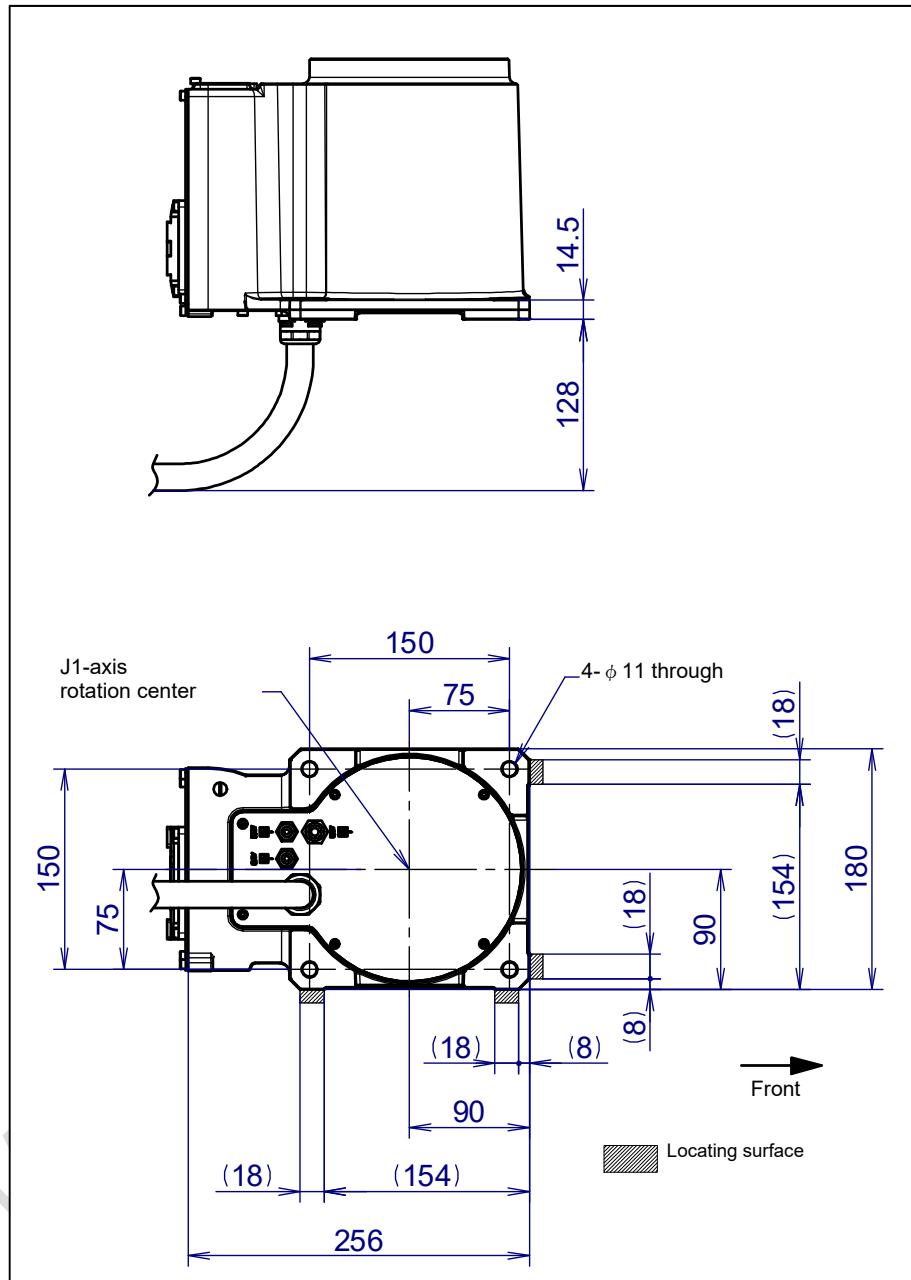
(d) Dimensions of the robot base (bottom side connector plate) (SR-6iA, SR-6iA/H)
